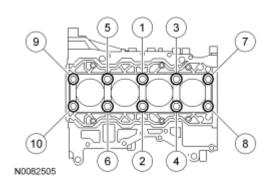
Identifying Main Bearing Beam Bolts Tightening Sequence
